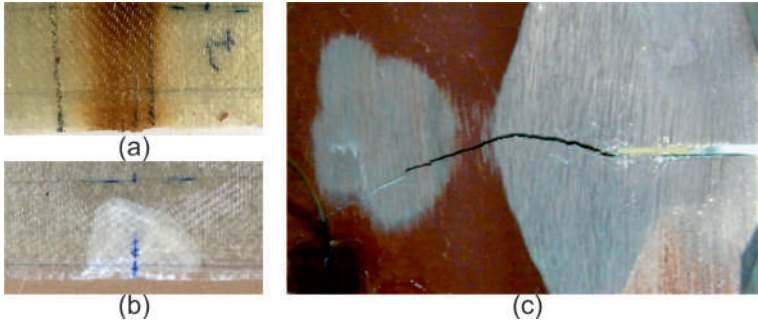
Damage examples: a) burning, b) delamination, c) crack.
